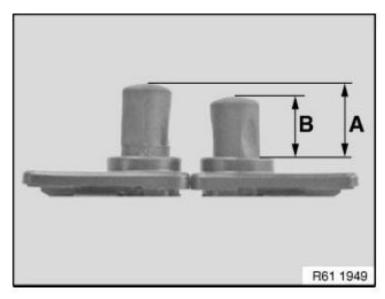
Identifying Basic Setting For Engine Hood/Bonnet Courtesy of BMW OF NORTH AMERICA, INC.
